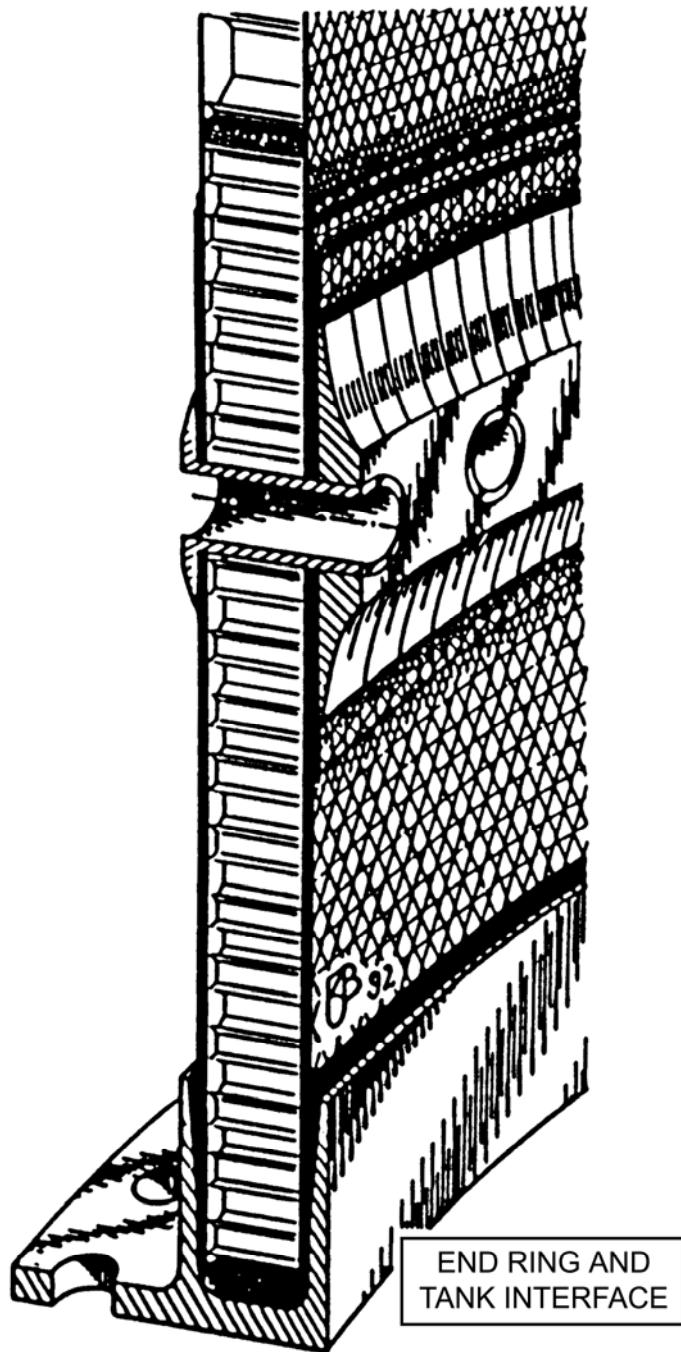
Case study: Filament wound thrust cylinder - joint design: Tank interface and end ring
